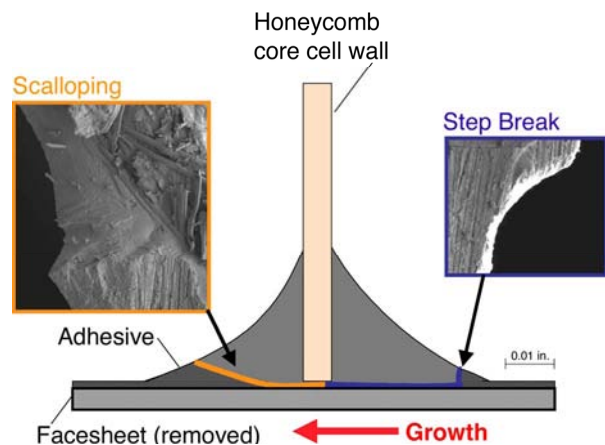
Fracture of the rudder honeycomb core from the facesheet.
